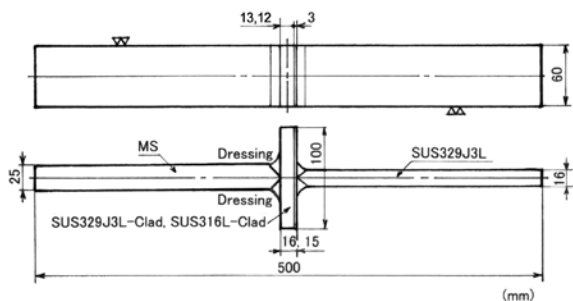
Shape and size of fatigue test specimen (Load-carrying full penetration cruciform welded joint)
